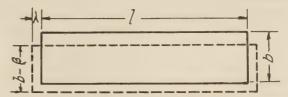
Diagrammatic Sketch of a Longitudinal Section of Boiler Tube Before and After Rolling
